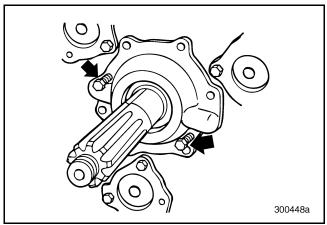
Use Jackscrews to Remove Main Drive Pinion Assembly
